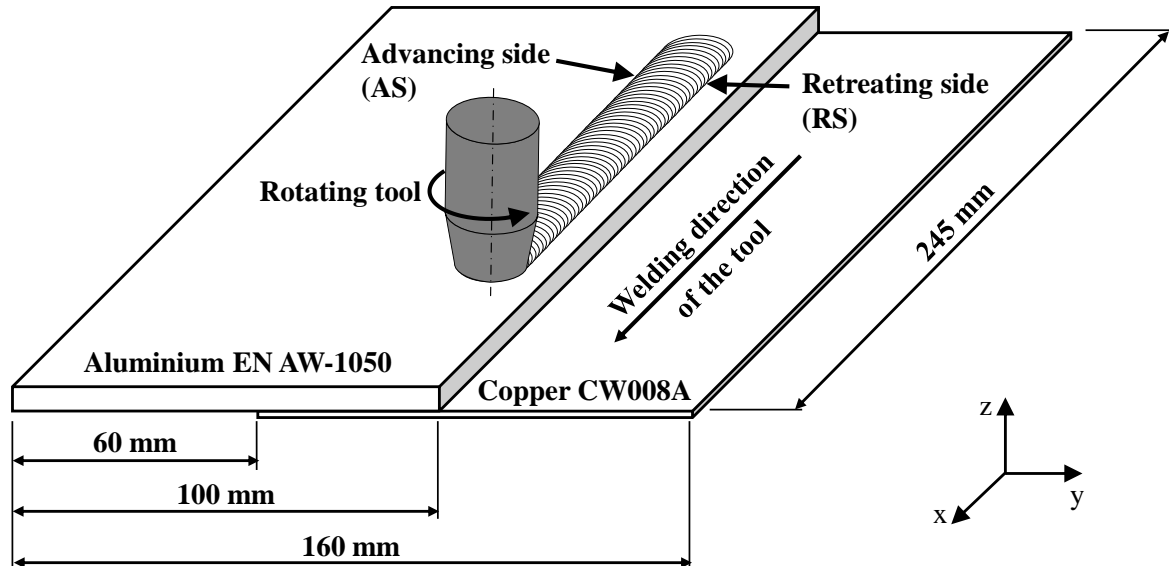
Schematic diagram of the sample dimensions and of the lap-welded aluminium-copper joints according to [14].
